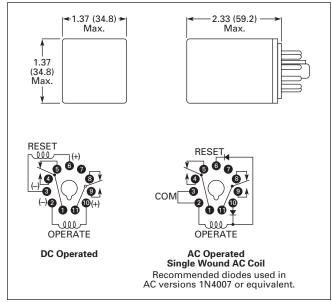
D3PR2/D3PR3 — Approximate Dimensions in Inches (mm)
